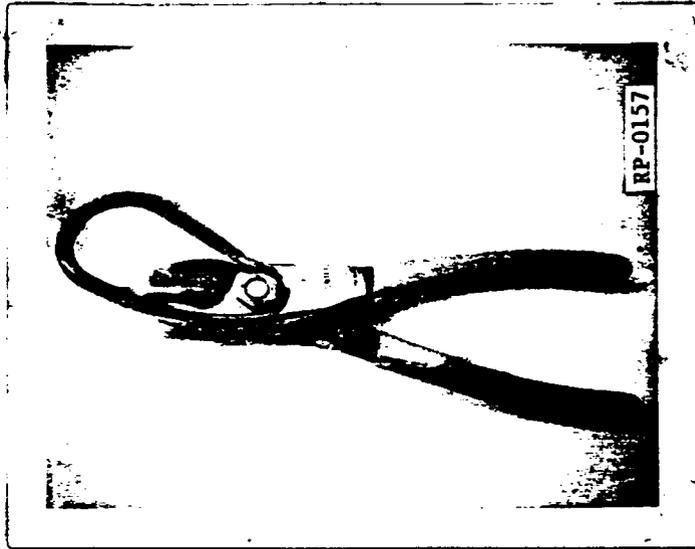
R-4225 8" CABLE CUTTER WITH GUARD
